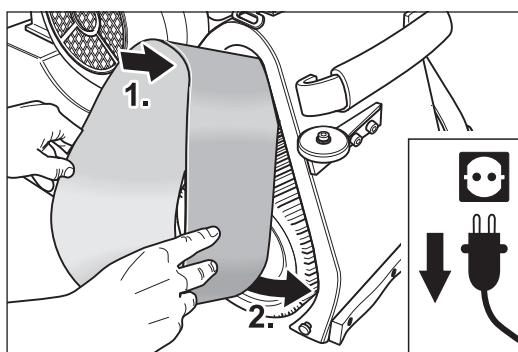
Position the sanding belt on the tensioning roller of the drive unit.
